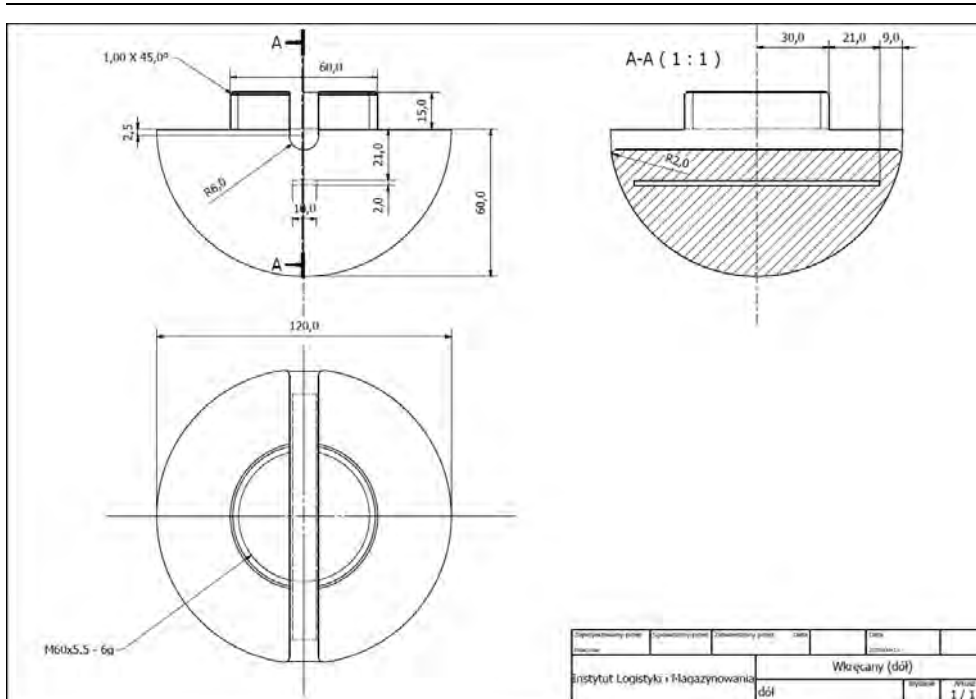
Float 2 “screwed”-lower part - the technical drawing
